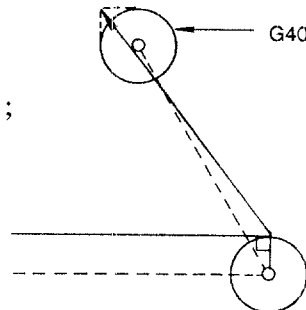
Straight-line to Straight-line at Outside Corner
